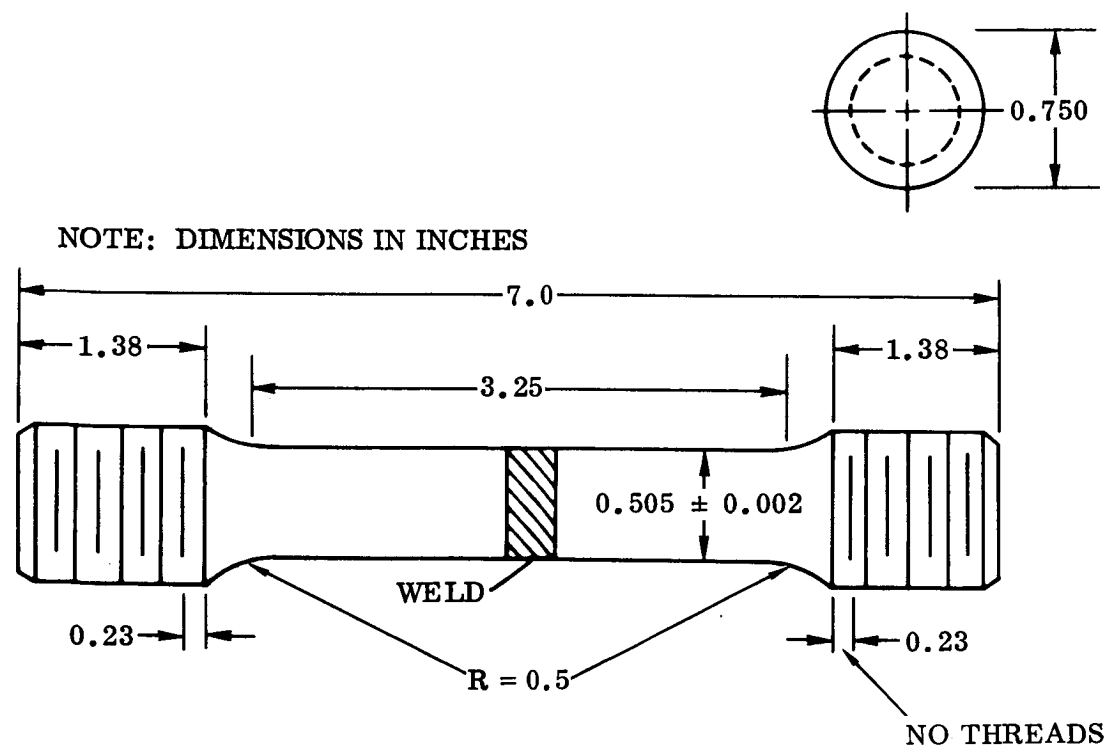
Weld Tensile Specimen of 1.0-Inch Thick 2219-T81
